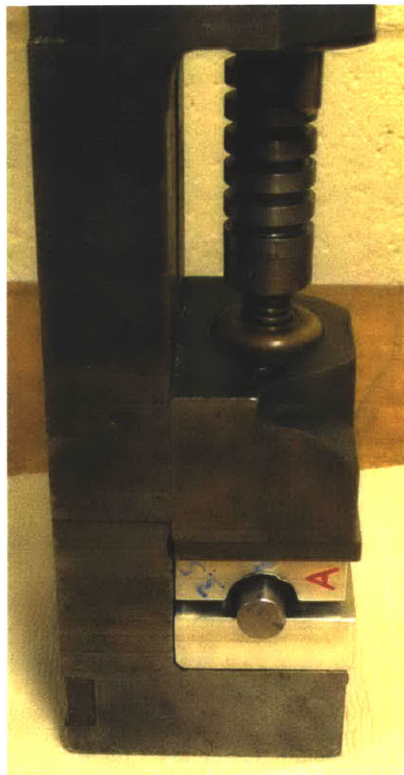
Vise exerting pressure for moulding or rubber bearings.
